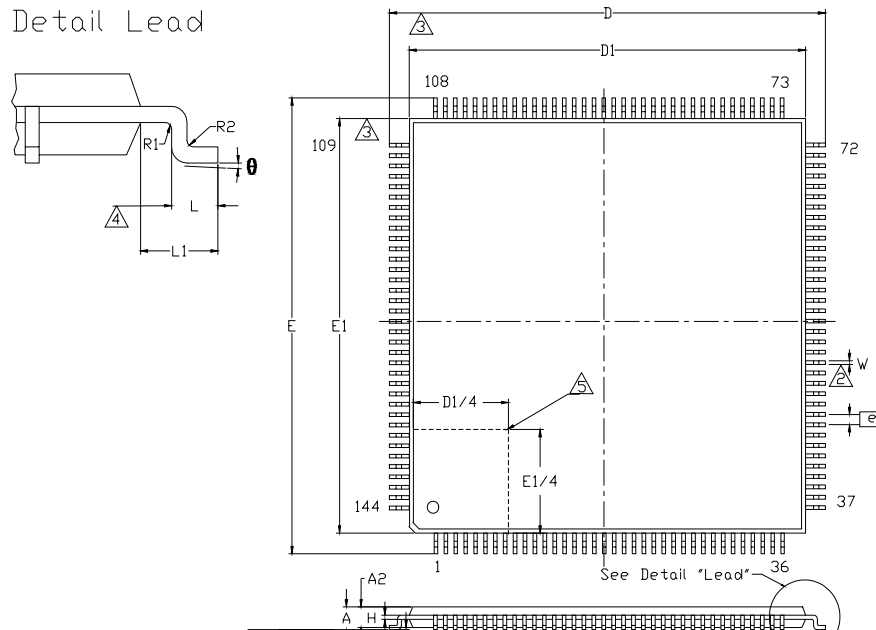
144 Pin VTQFP Package Outline, 20 x 20 x 1.0 Body 2mm Footprint
